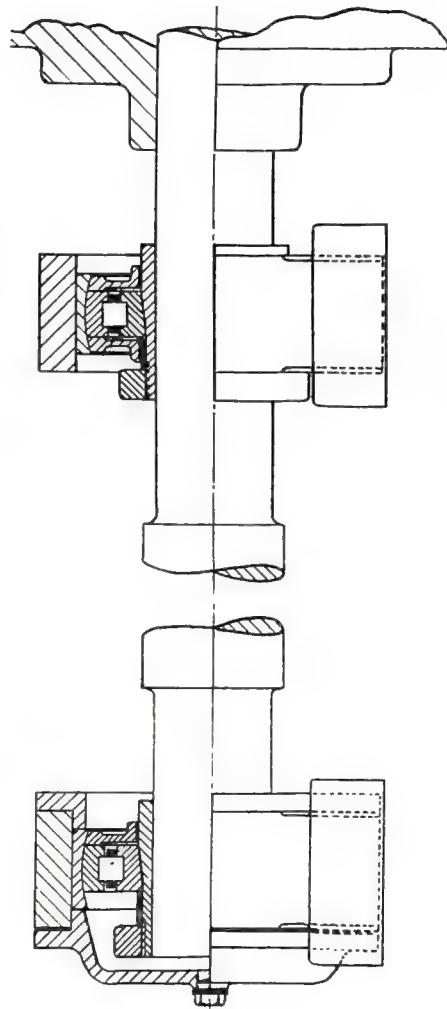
Self-Aligning Roller Bearings to Fan Shaft.
